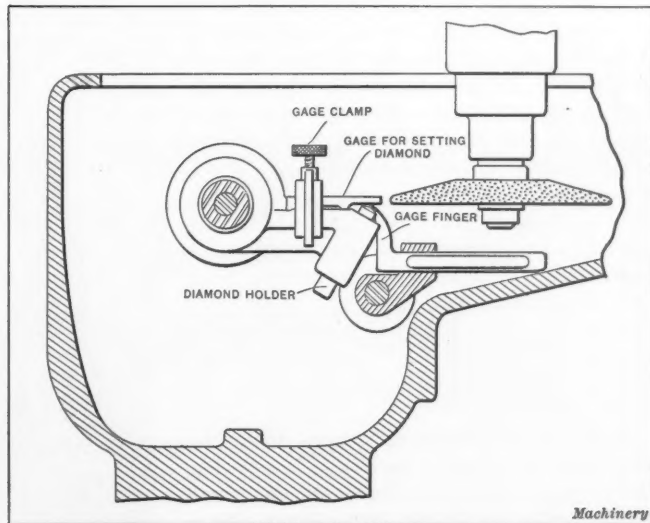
Cross-sectional View, showing Diamond Holder and Gage for setting the Diamond
